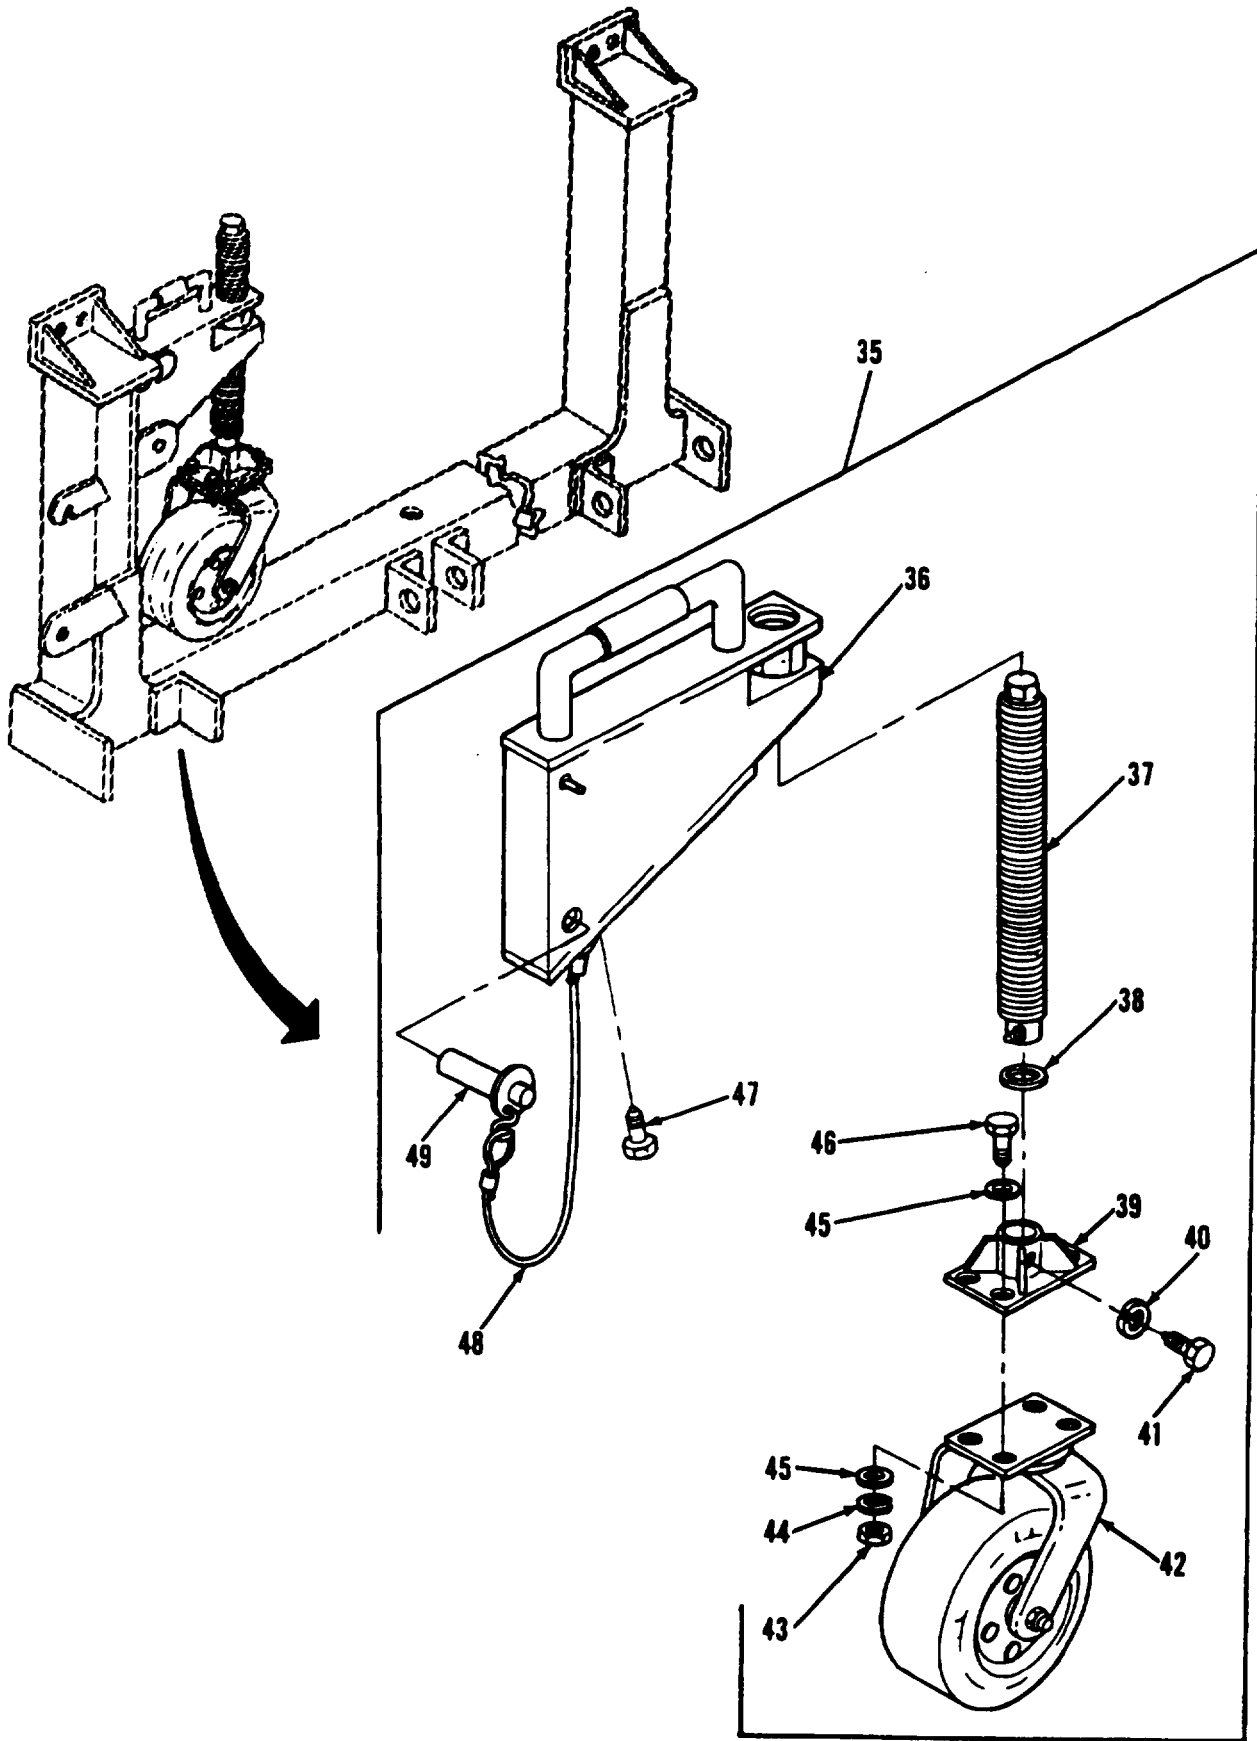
REAR SUSPENSION BAR AND RELATED PARTS (M832) (SHEET 2 OF 2).
